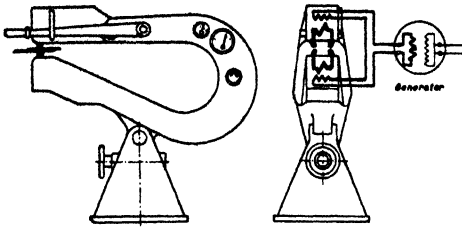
Welding frame and wiring diagram of the Berghaus 2-point spot welding machine.
